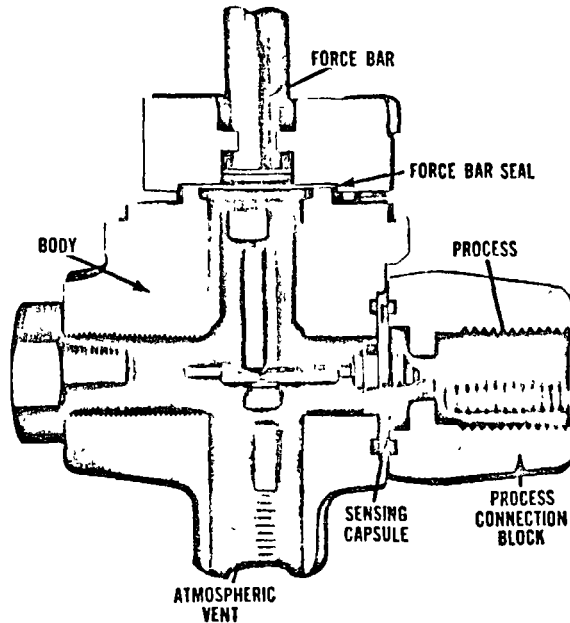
Sectional View of Pneumatic Force-Balance Pressure Transmitter.
